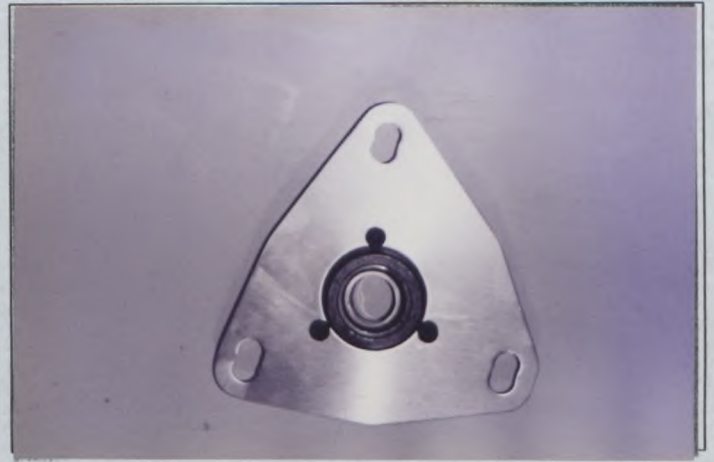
HEAVY DUTY TOP MOUNT - FRONT
